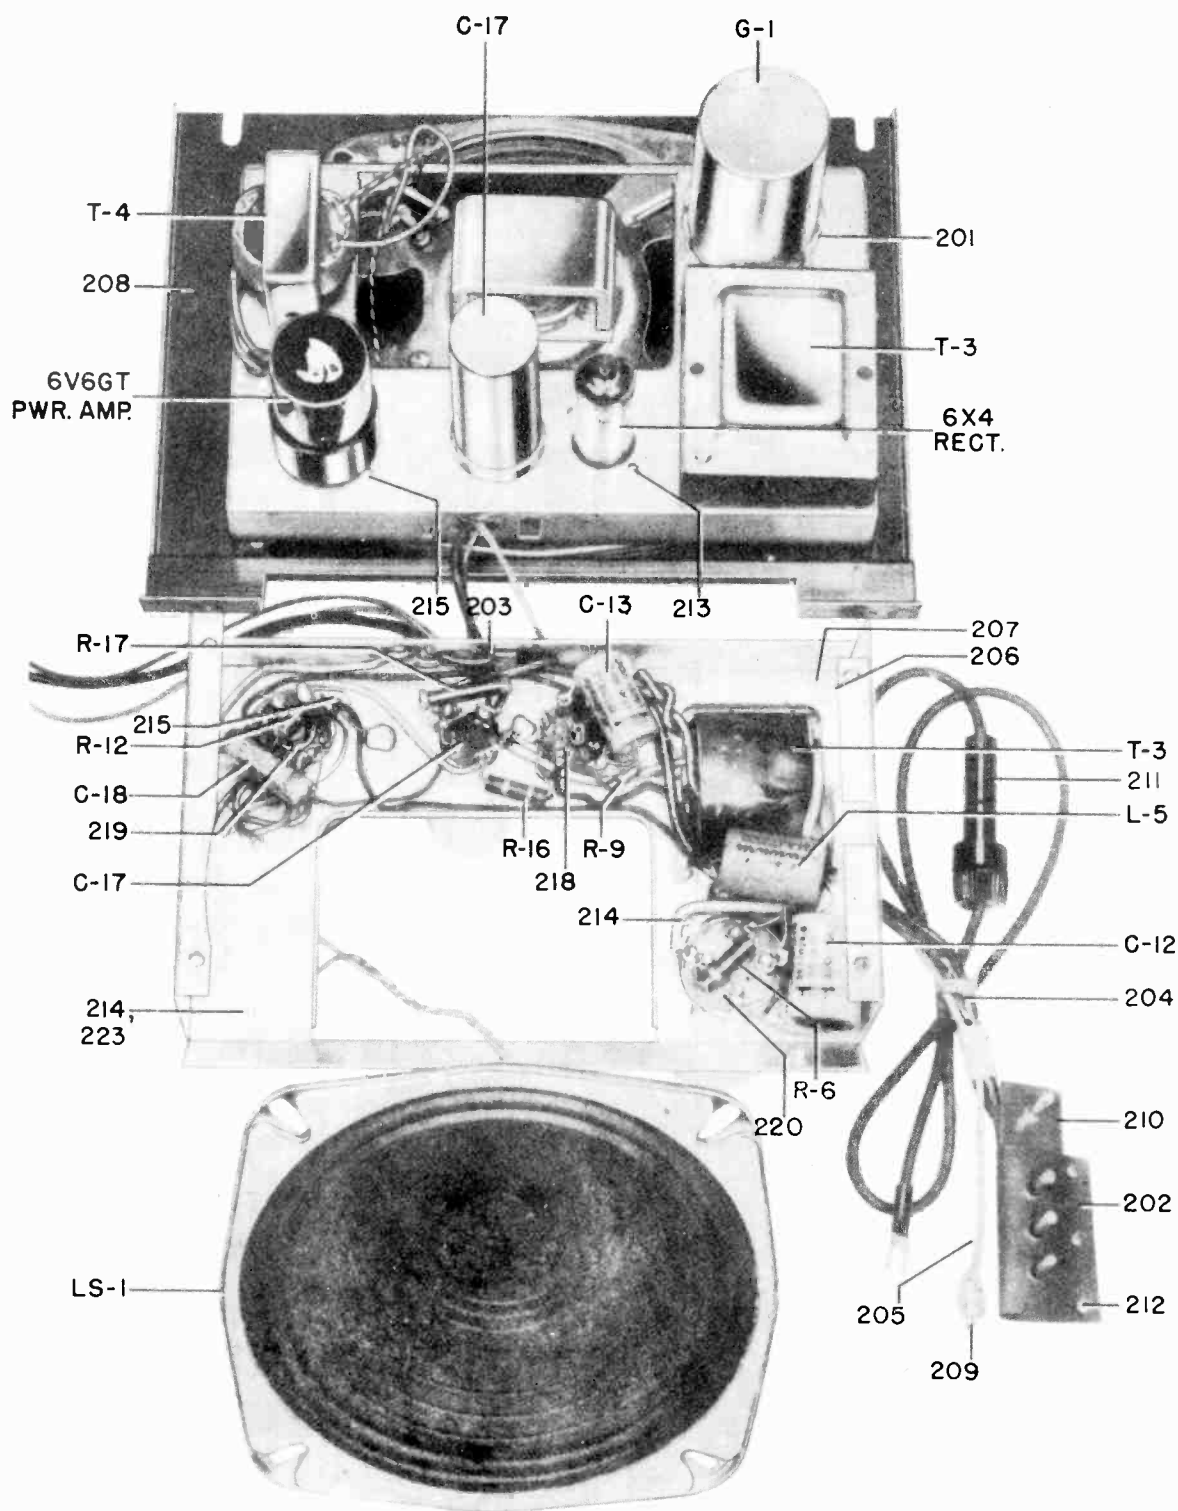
PARTS LOCATION - POWER & AUDIO UNIT
